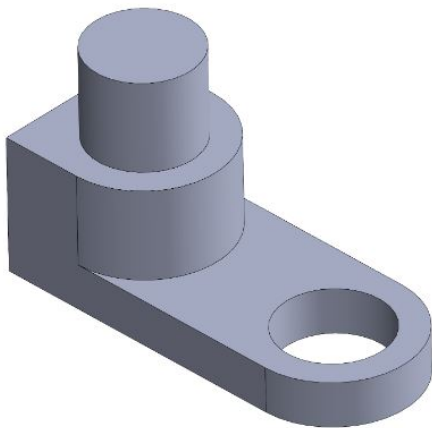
The design of the new linkage piece, which has a pin instead of a pinch bearing.
